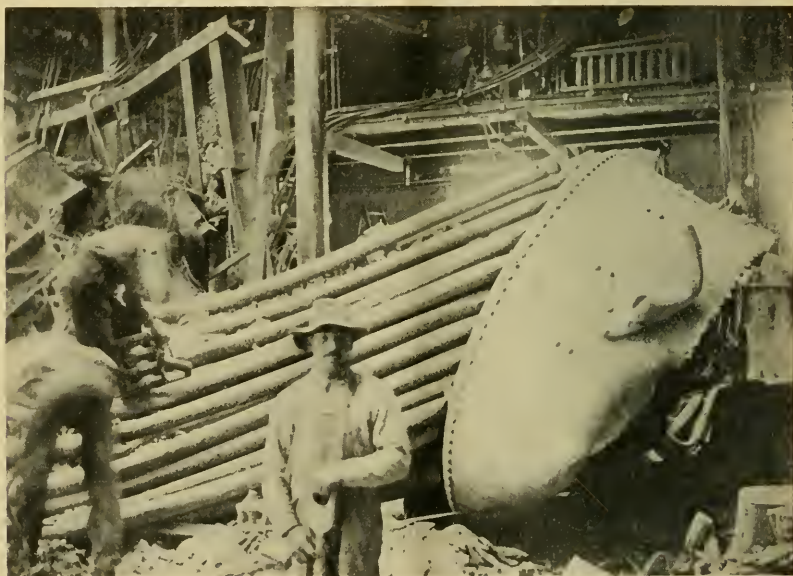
THE BOILER, AFTER THE EXPLOSION.
